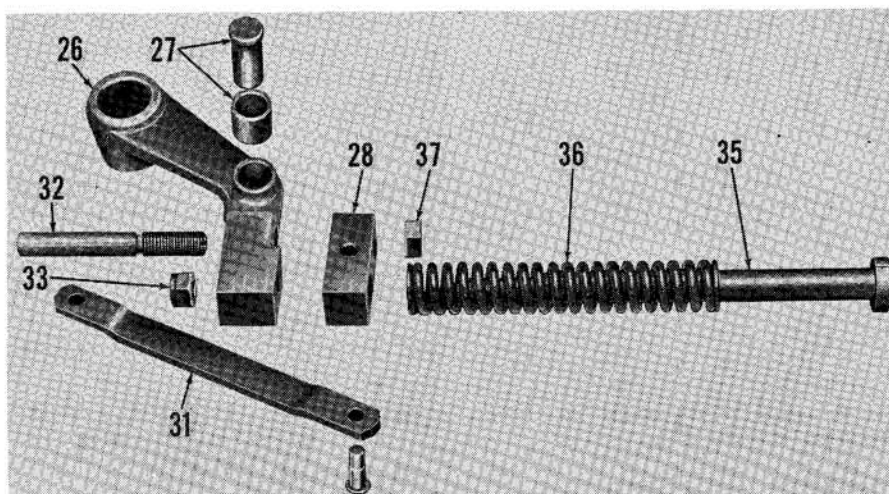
Exploded view of model "FSM" position control linkage. Refer to Fig. 210 for legend.
